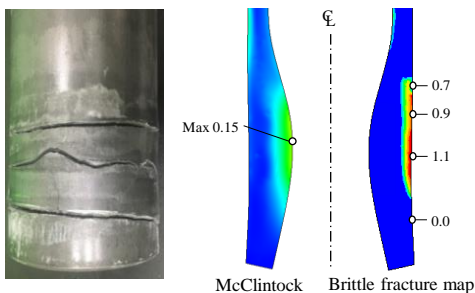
Brittle fracture of forgeable materials during cold shell nosing process.
